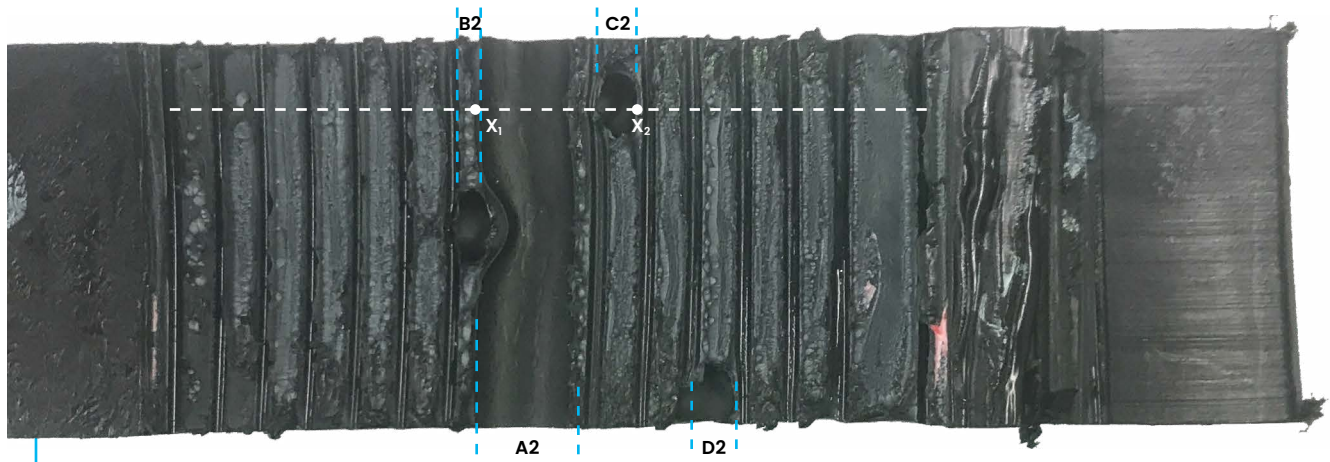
Electrofusion coupler – plan view of the full fracture zone matching the close-up image of the pipe side shown in Figure 13.
